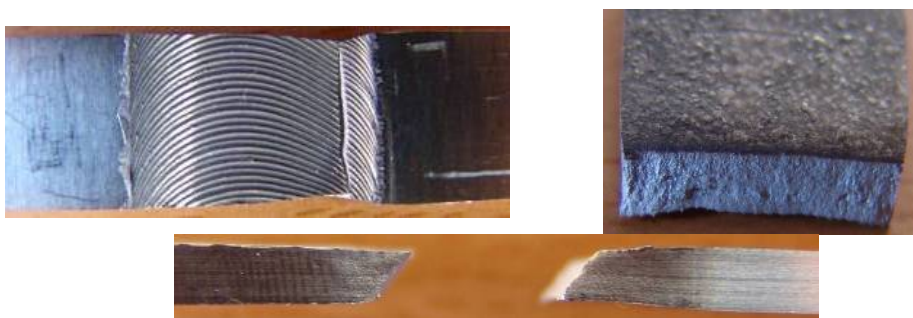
Fracture surface of AA6082-T6 FS welded specimen.
